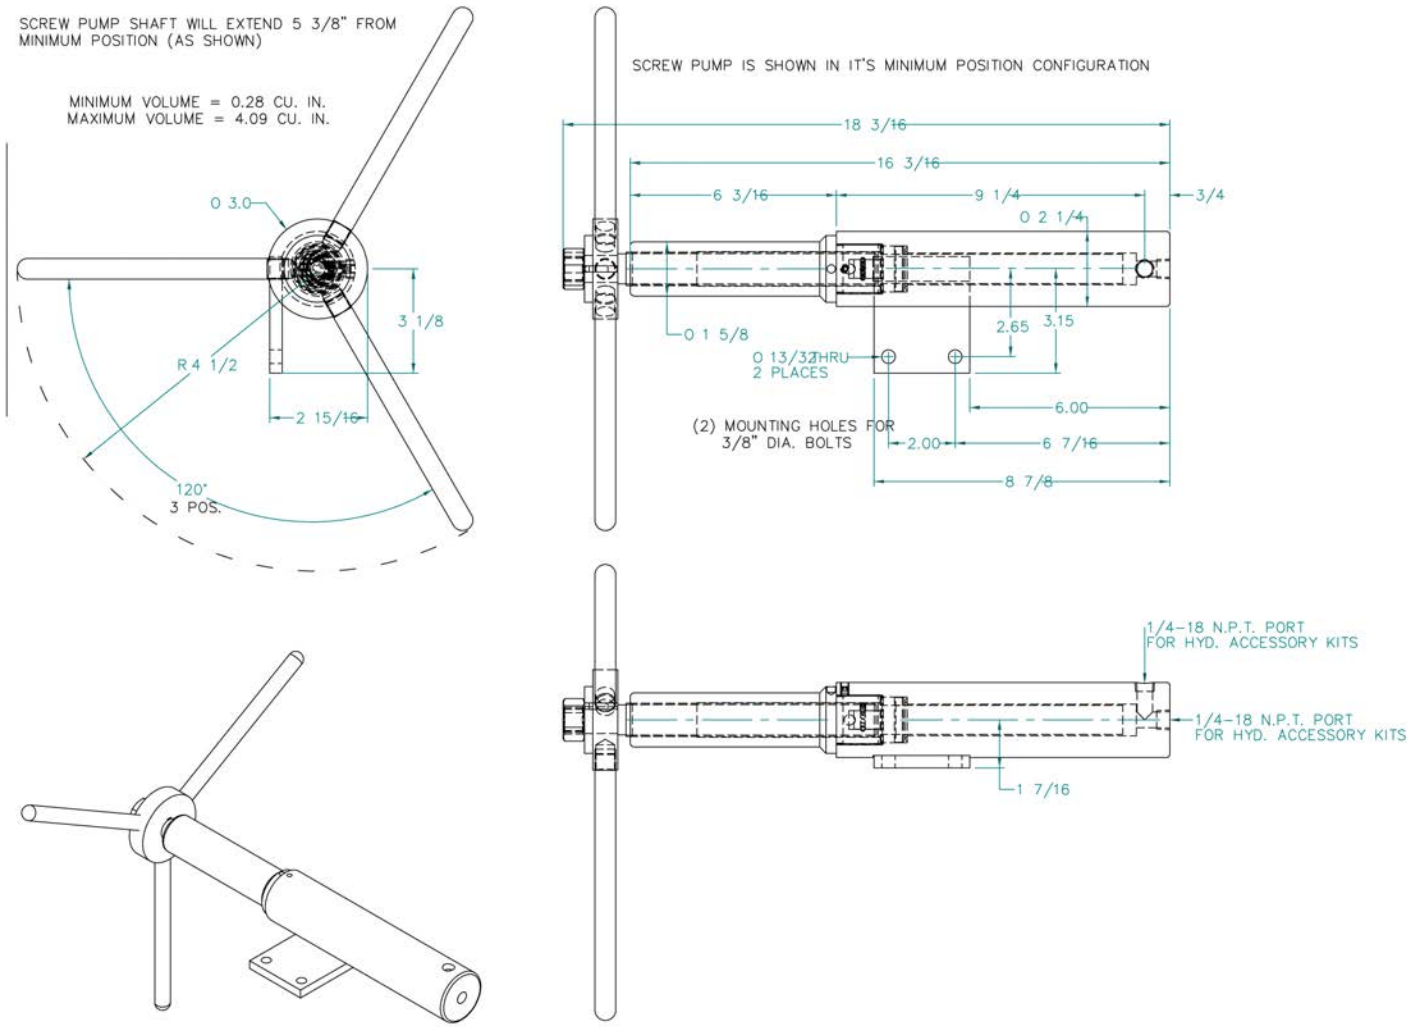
Full Unit Outline for Morehouse Hydraulic Screw Pump (Drawing 806000-01)
